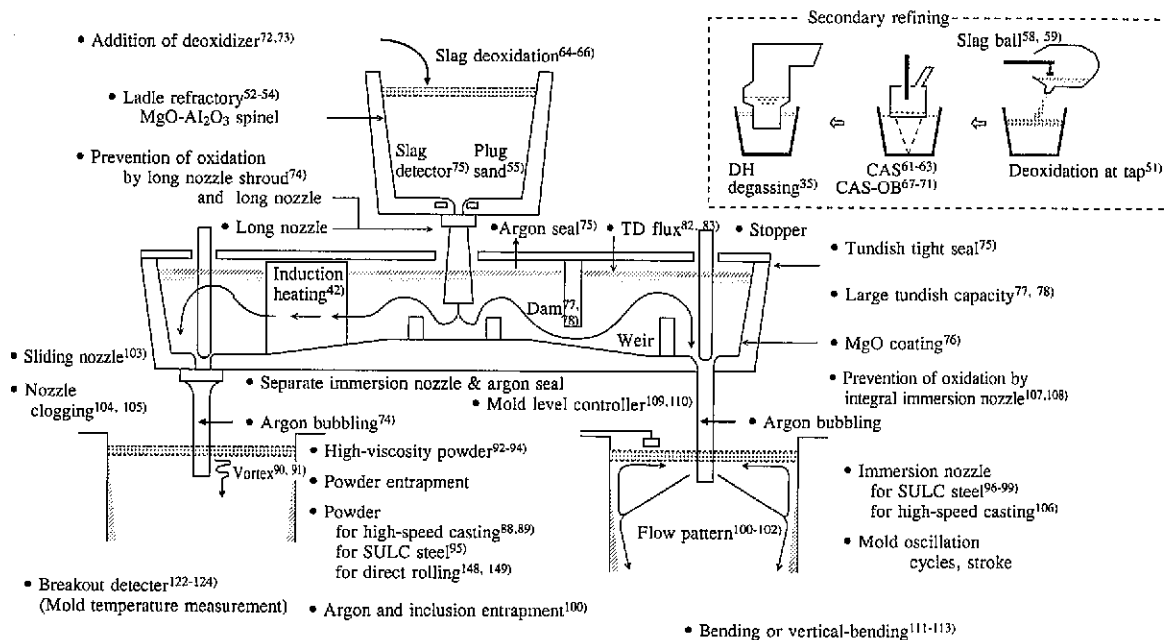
Composition of continuous casting technologies from ladle to mold at Yawata Works
